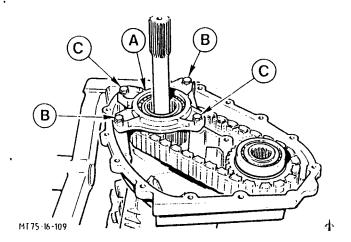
Fit bearing housing A - Bearing housing B - Short bolts
